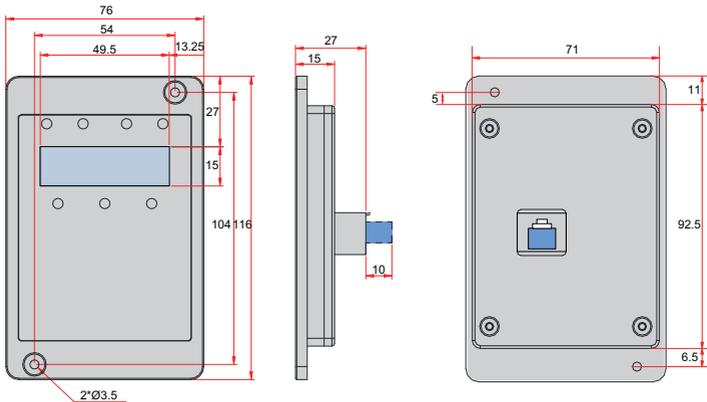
Appearance and installation dimensions of the LED operating panel (unit: mm)
